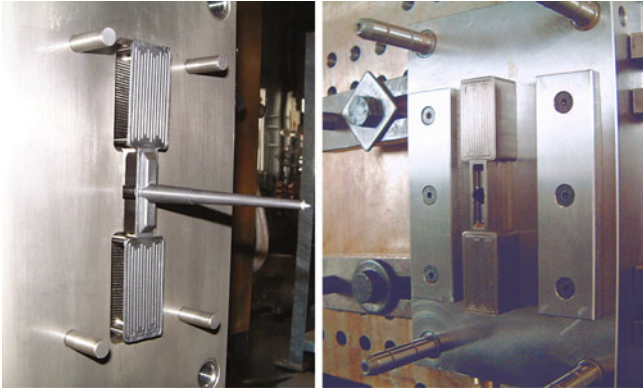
Injection mold tool with two cavities for bipolar plate production
